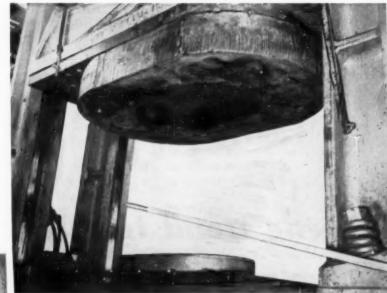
Formed sheet-metal part on the form block after being struck by the trapped-rubber head of a drop hammer.
